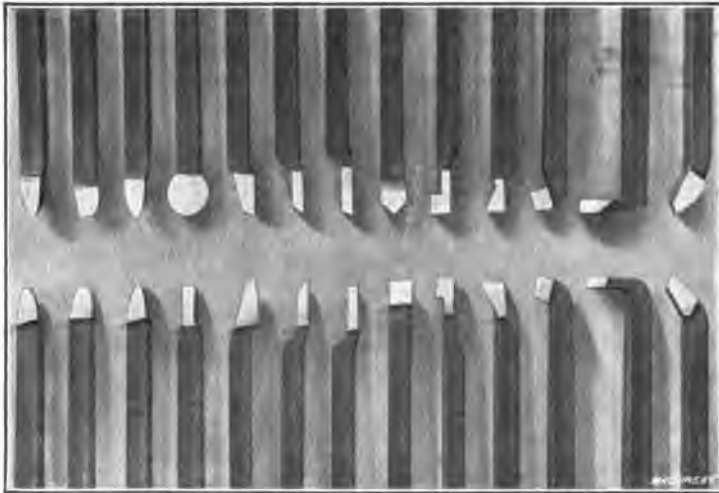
Set of Planer Tools ground on Sellers Tool-grinding Machine
